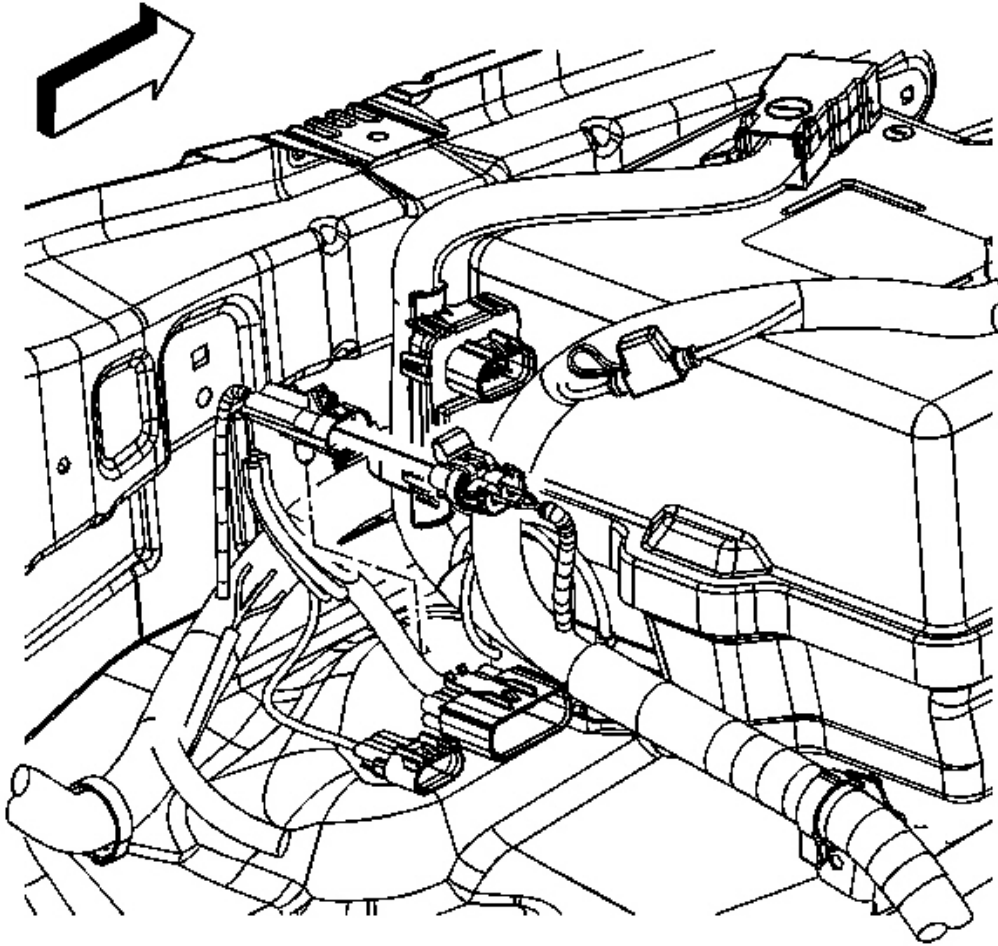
Identifying Battery Cable Wiring Harness Connector
